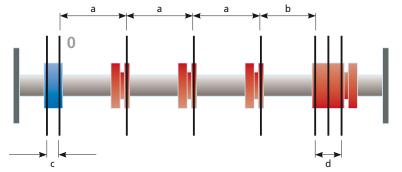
Movable saw configuration with one fixed and four movable saw bushes
